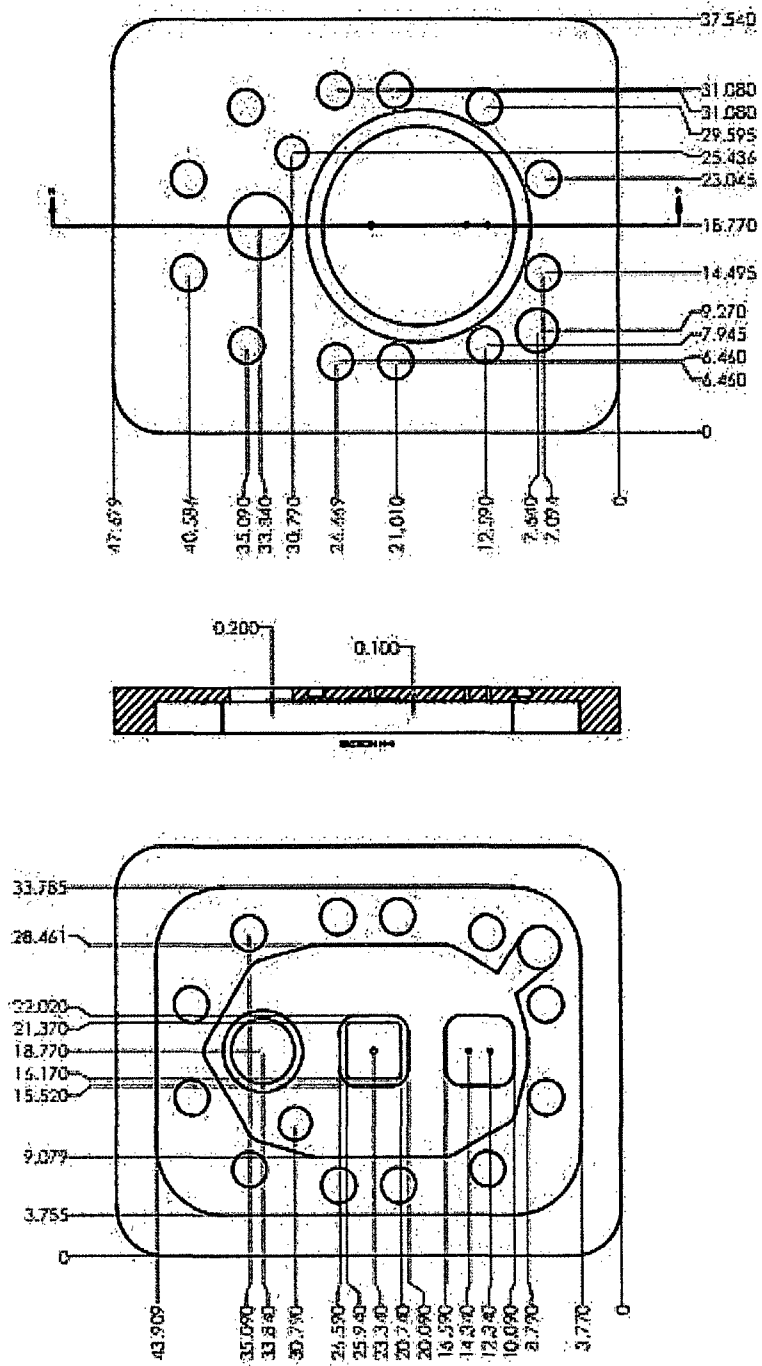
Top housing of 2-stage microcompressor, body 1.
